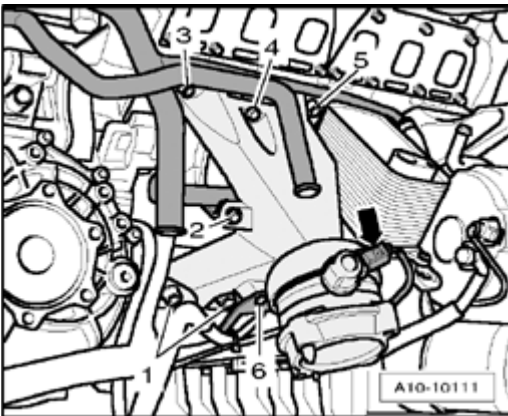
Right Engine Mount Electrical Harness Connector & Bolts
